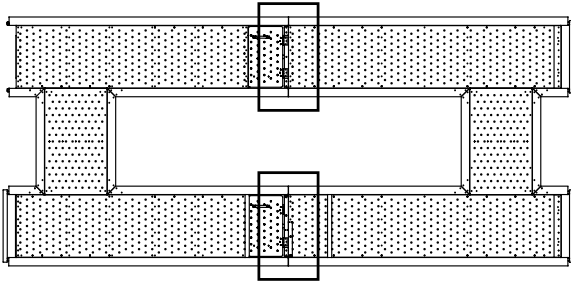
24' Acceptable Blower Mount and Access Platform Installation Locations
